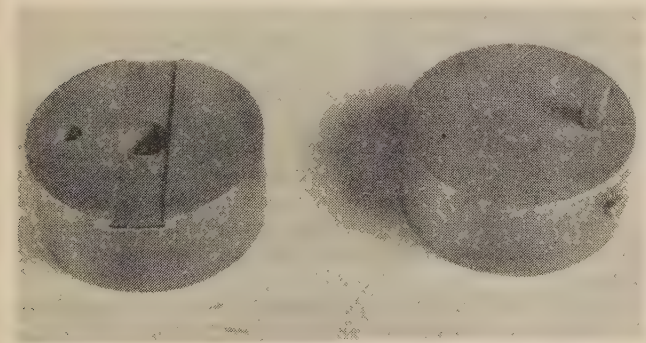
TEST SPECIMEN NO. 1F; CHROMIUM-PLATED CAST CARBON STEEL AFTER 500-HR TEST AT 388 F
